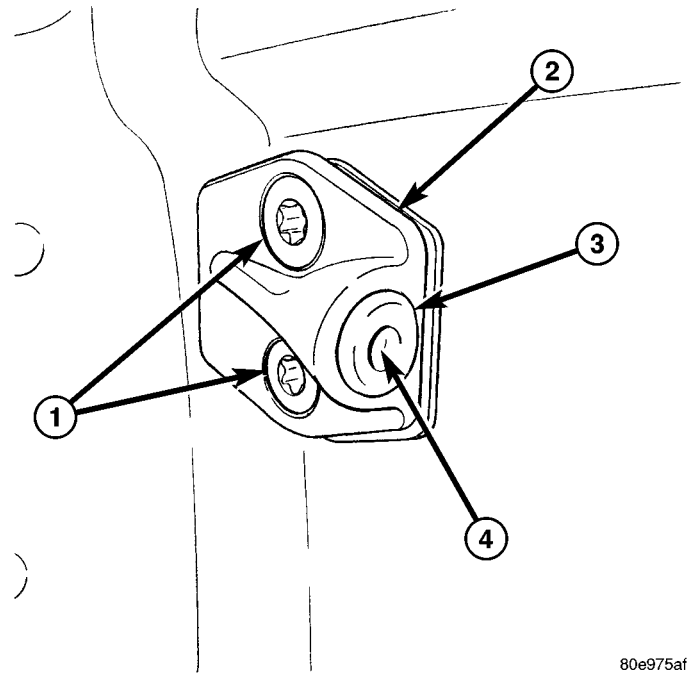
DOOR PIN RECEIVER ADJUSTMENT
